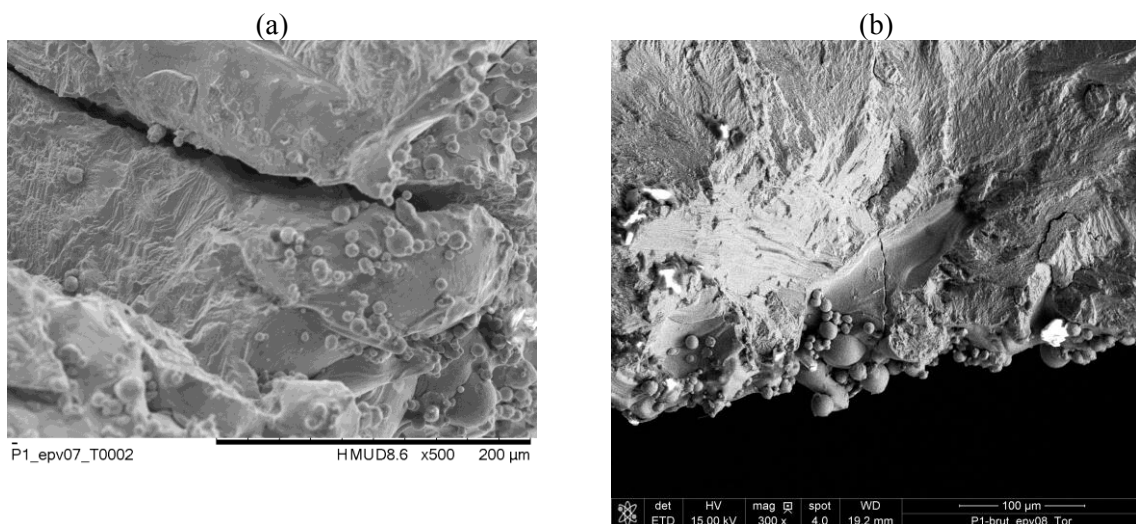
Defects at the origin of failure in as-built torsion specimens: (a) a series of surface defects; (b) two clustering subsurface defects
